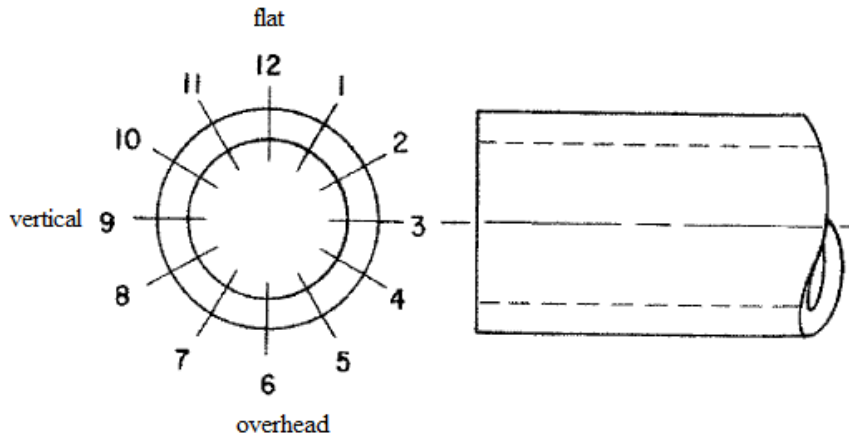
Schematic presentation of 5G welding [1, 2].
